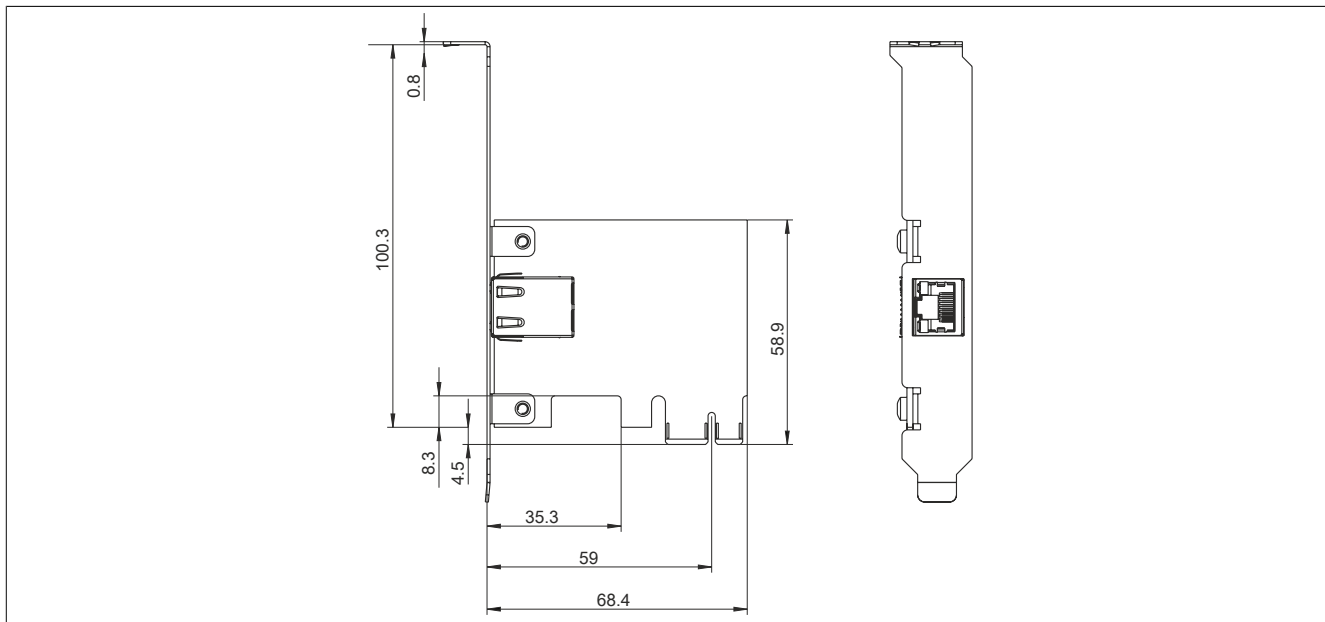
5ACPCE.ETH1-00 - Dimensions
